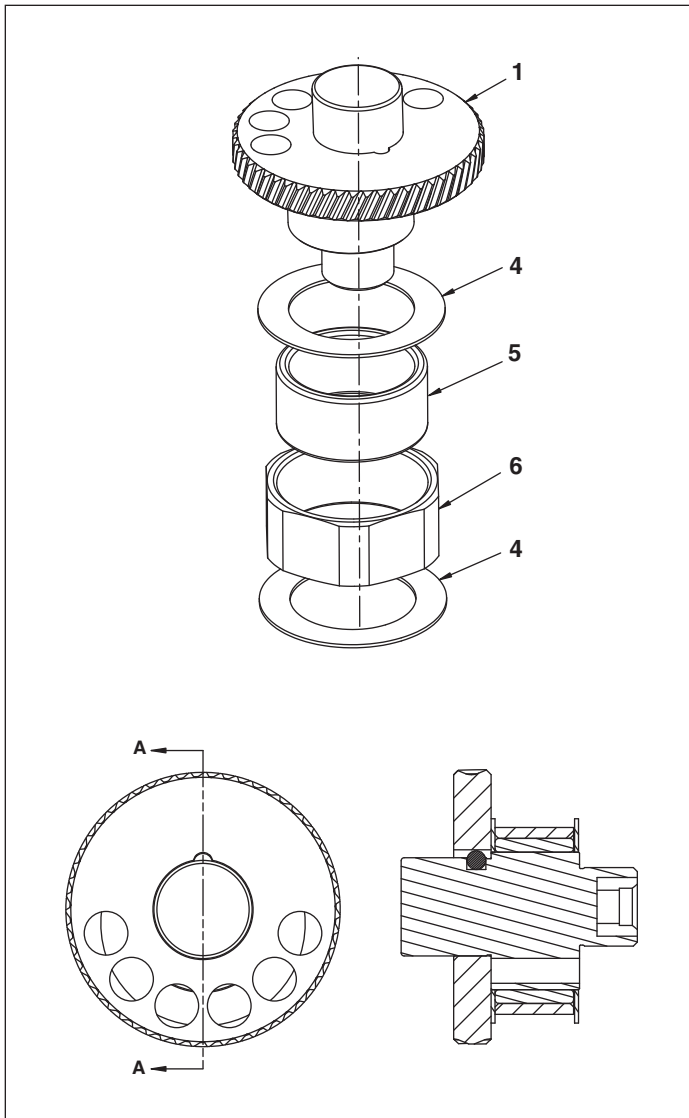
A, Eccentric Assembly for Gear Reduction Motor (ZU Series - All Date Codes)
